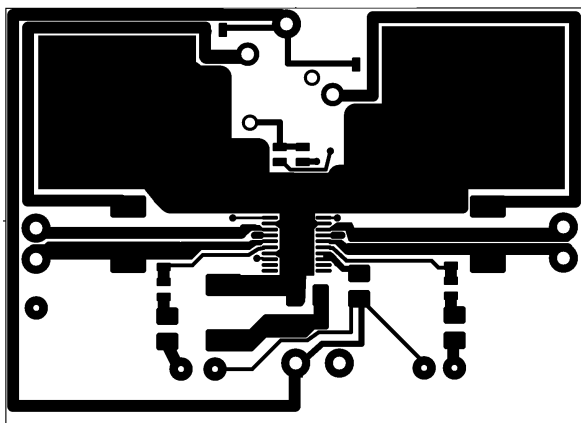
Recommended IAP PC board layout: Component-side layout
